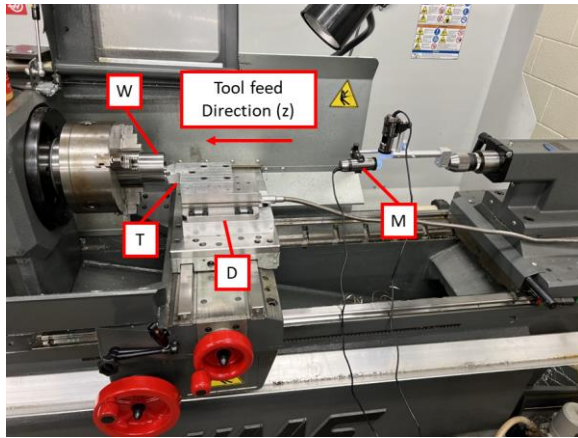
Photograph of orthogonal cutting setup including workpiece (W), dynamometer (D), cutting tool (T), Dino-Lite digital microscope (M).
